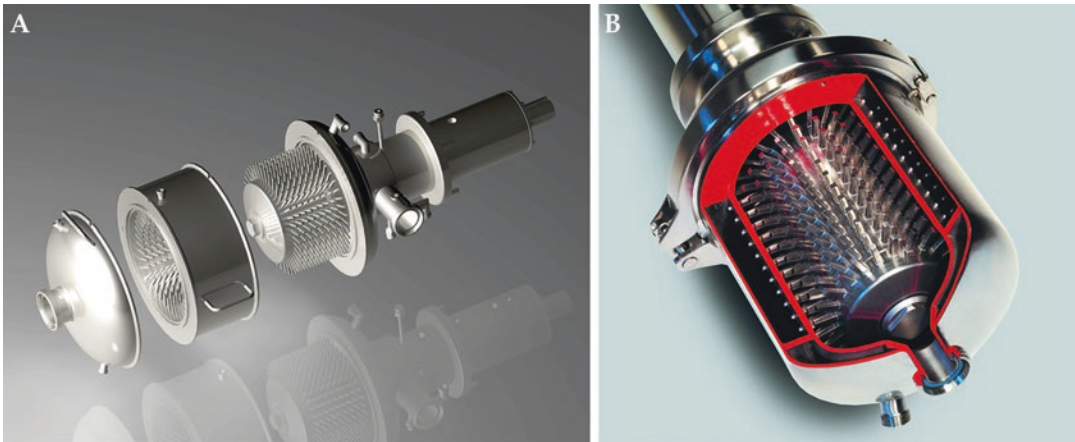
Continuous marshmallow aerator of rotor-stator design: (a) Entire assembly; (b) rotor-stator head (Courtesy of Haas-Mondomix)
